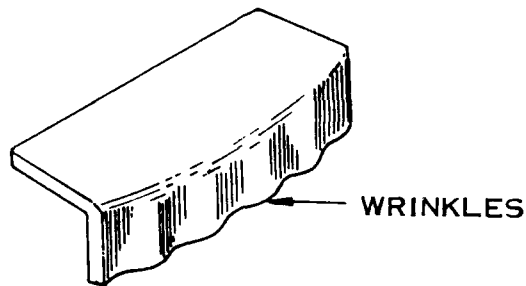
WRINKLING IN RUBBER FORMED SHRINK FLANGE
